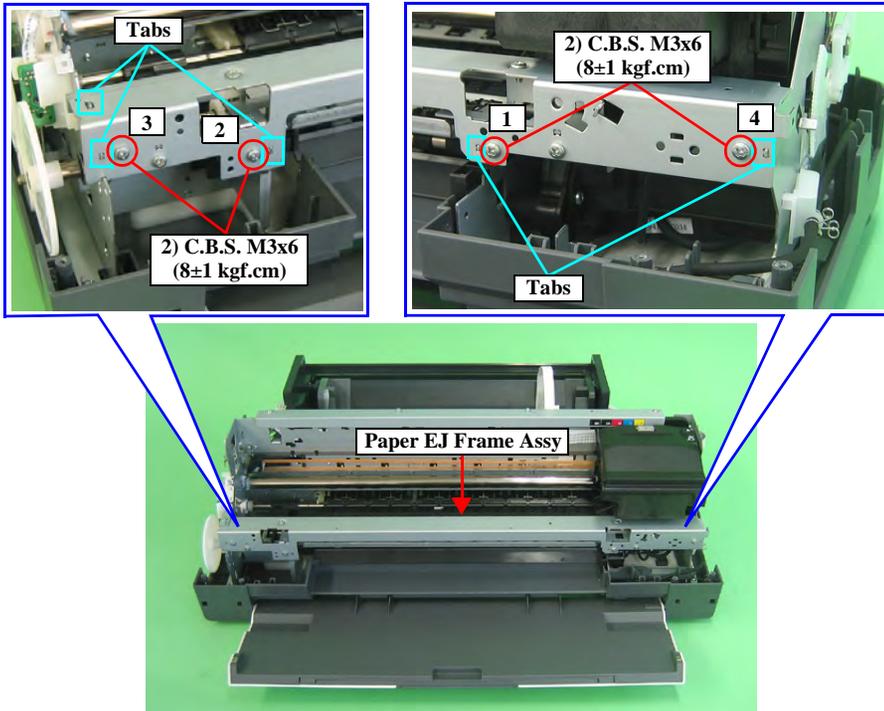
Screws that Secure the Paper EJ Frame Assy
